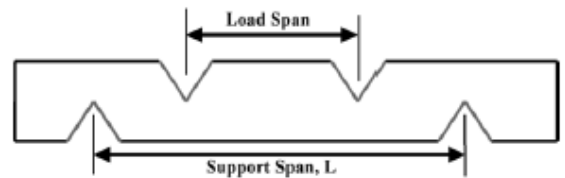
Fixture Used to Align Loading Noses and Supports
